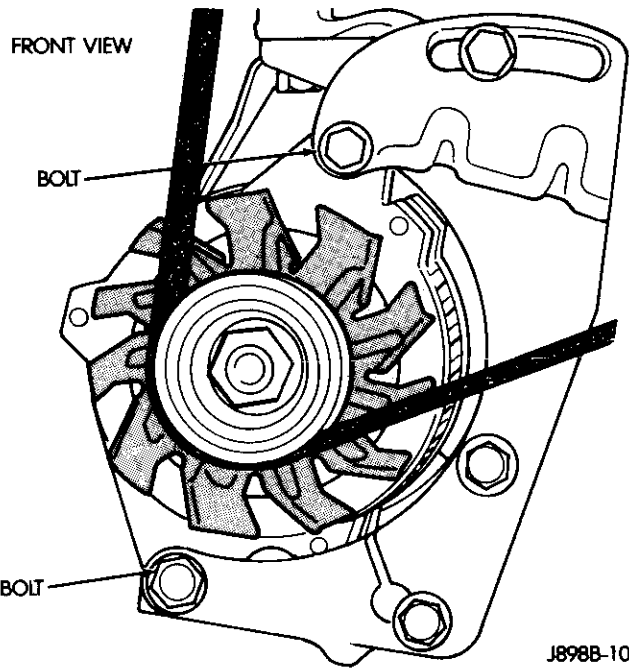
Alternator Removal/Installation - 2.5L w/A/C (Front View)
